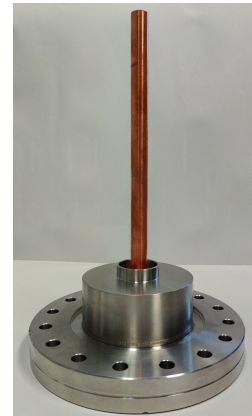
Cold part of the former coupler design recently built in the GSI workshop.
